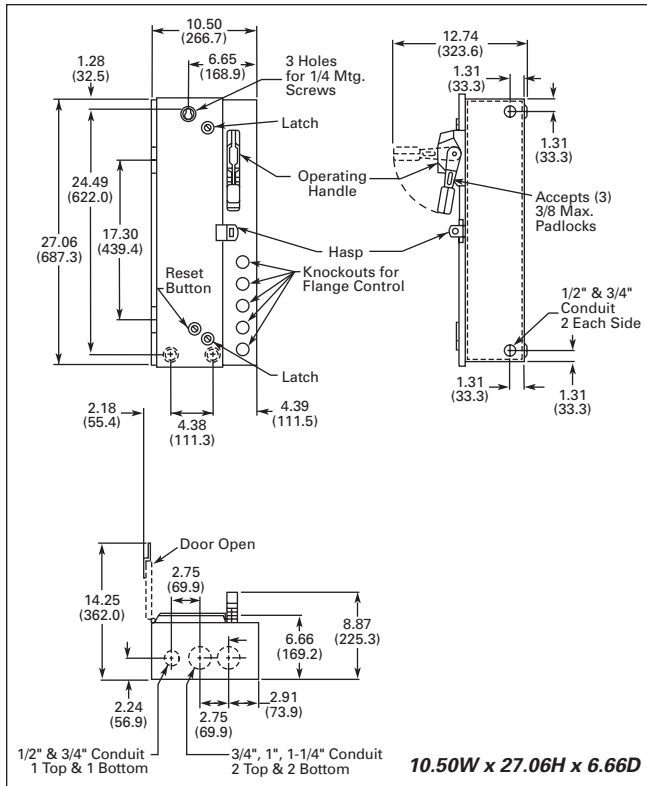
Box A, Type 1 — Approximate Dimensions in Inches (mm)
